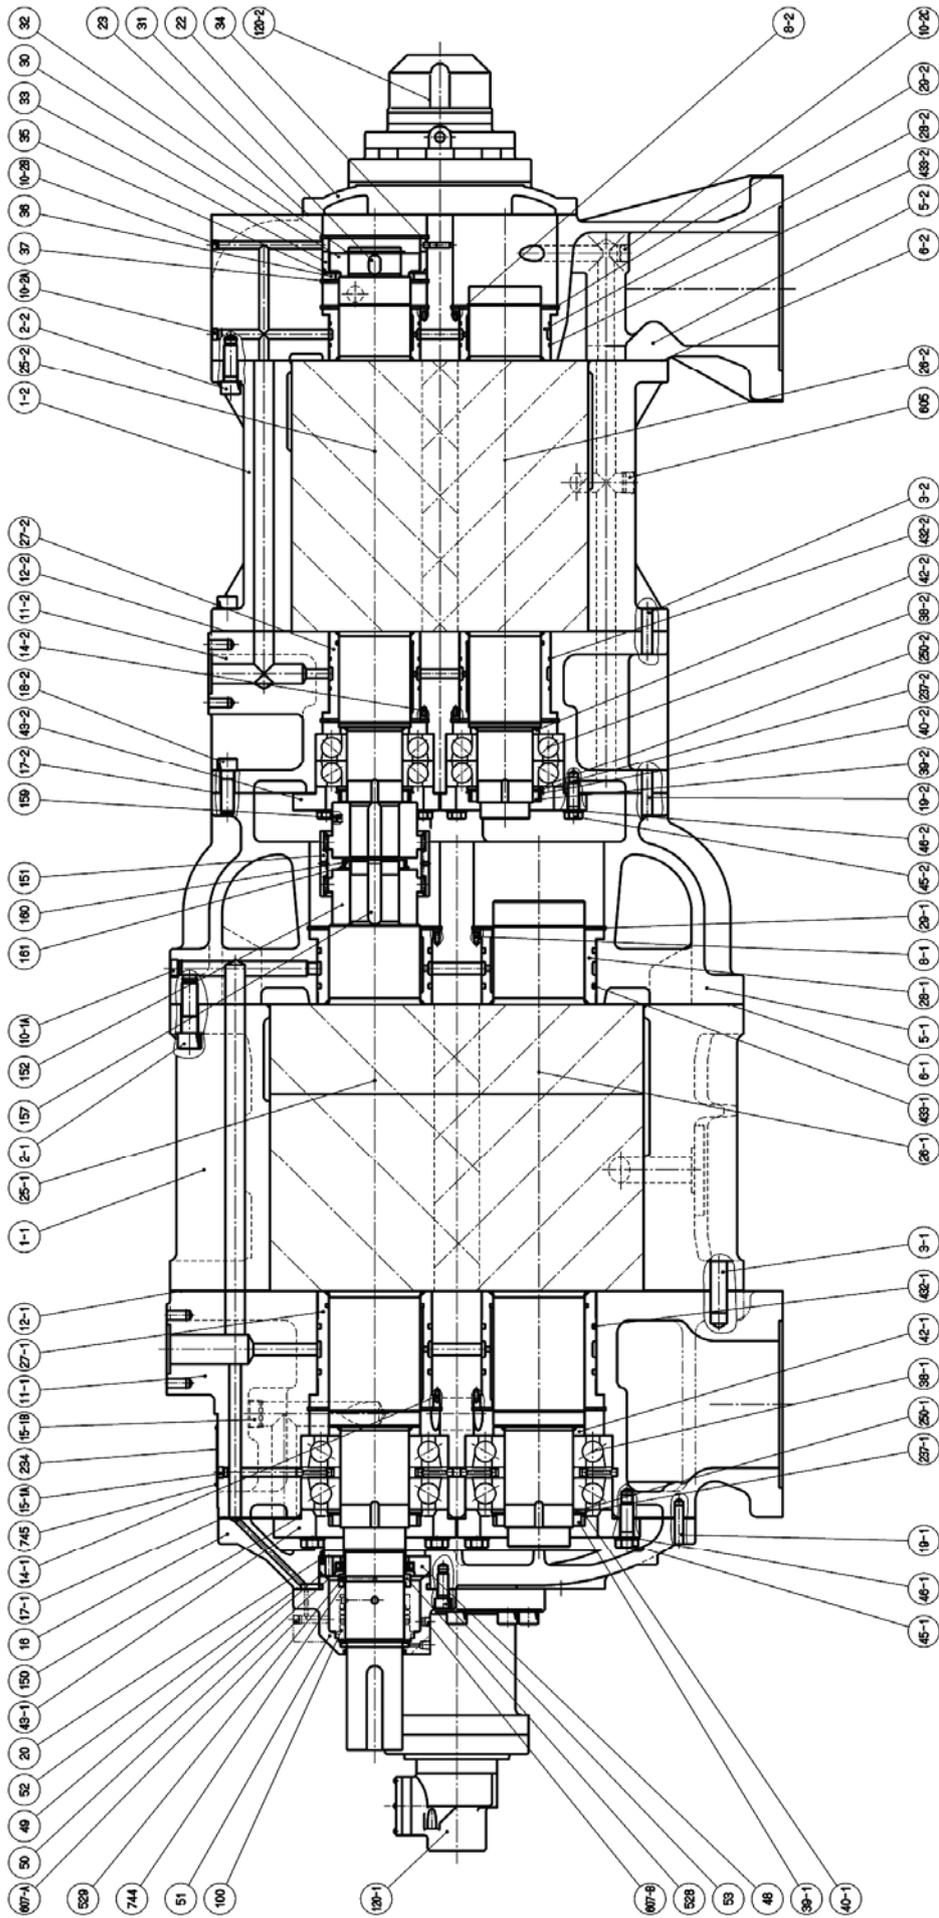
3225MLC Assembly Sectional View (Horizontal)
